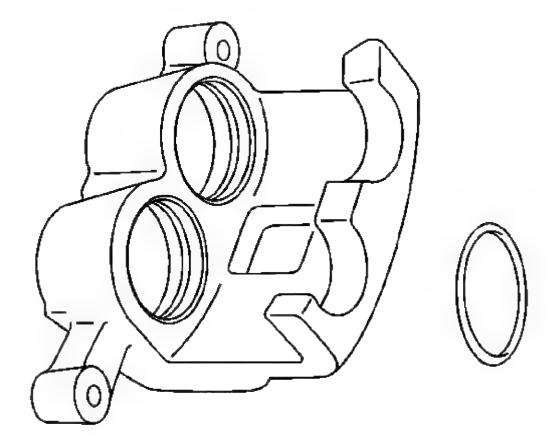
View Of Brake Caliper Piston Seal Courtesy of GENERAL MOTORS CORP.
